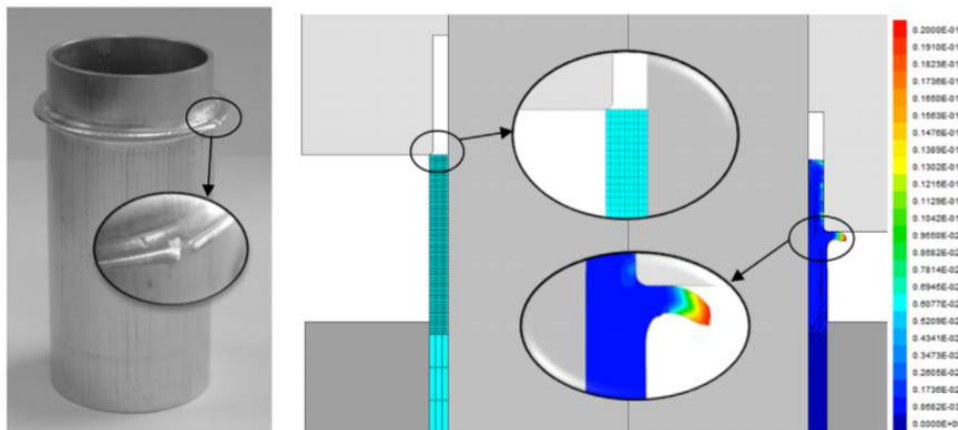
Sheet-bulk forming on tubes with a detail of the development of cracks on the flange for incorrect process parameters. (Alves et al., 2017).
